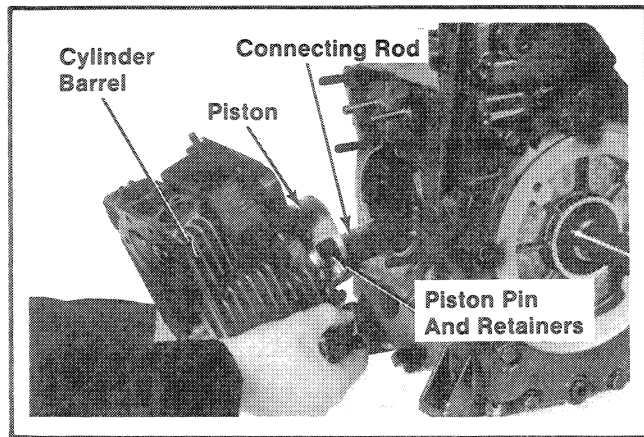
Installing Pistons/Cylinder Barrels To Connecting Rod.
